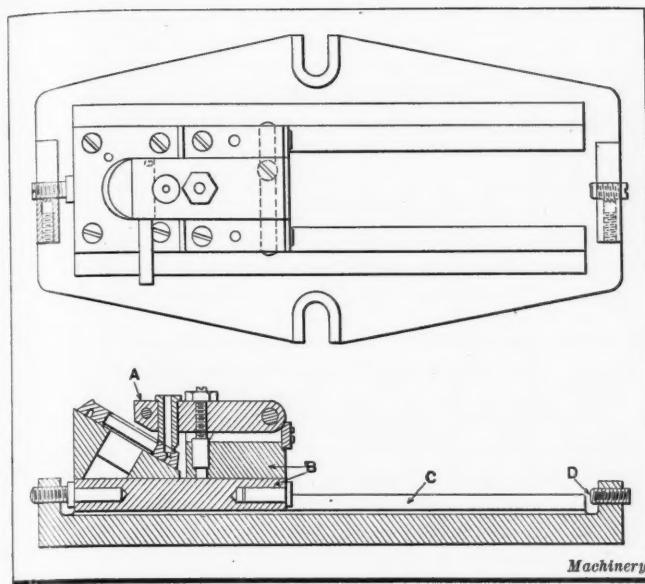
Jig for drilling and counterboring Flash Hole in Bottom Ring
